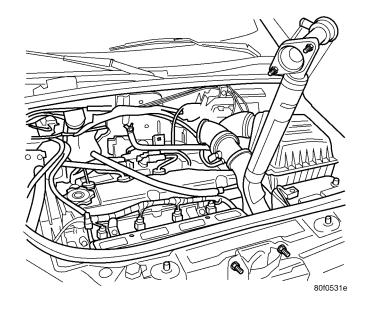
HOSE AND HOUSING ROTATED - 2.4L TURBO
